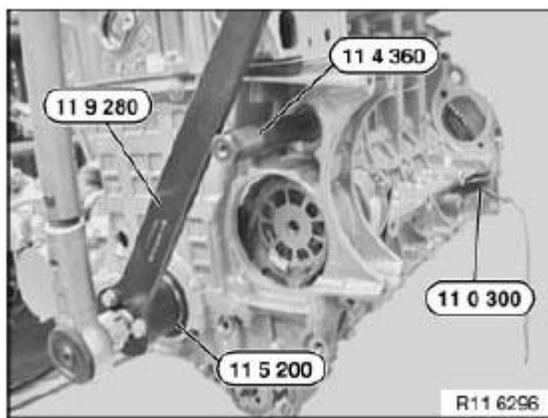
Identifying Special Tool (11 9 280, 11 4 360, 11 5 200 And 11 0 300)
